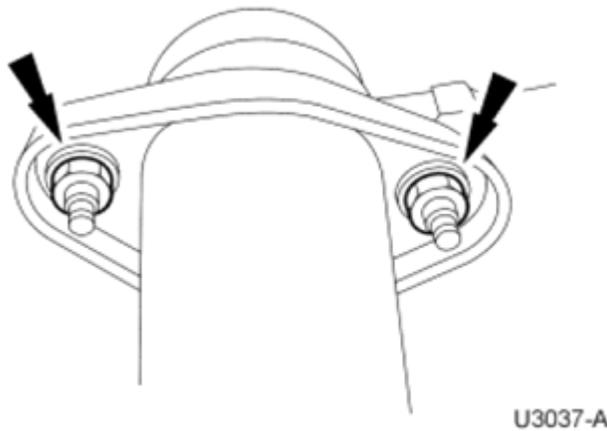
Locating Exhaust Y-Pipe Flange Nuts
